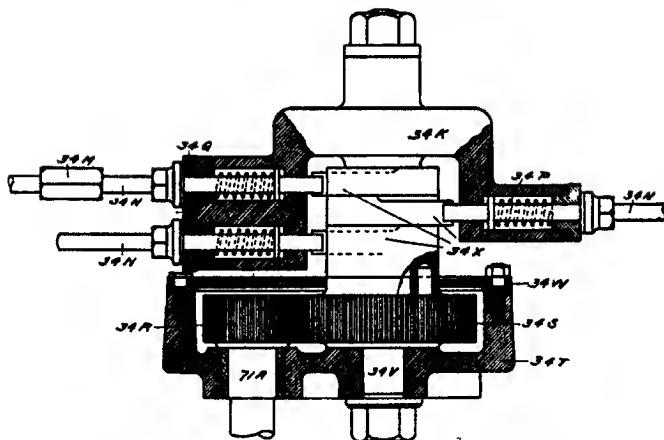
Igniter Gear for Three Cylinder Four Cycle Gas Engine.
